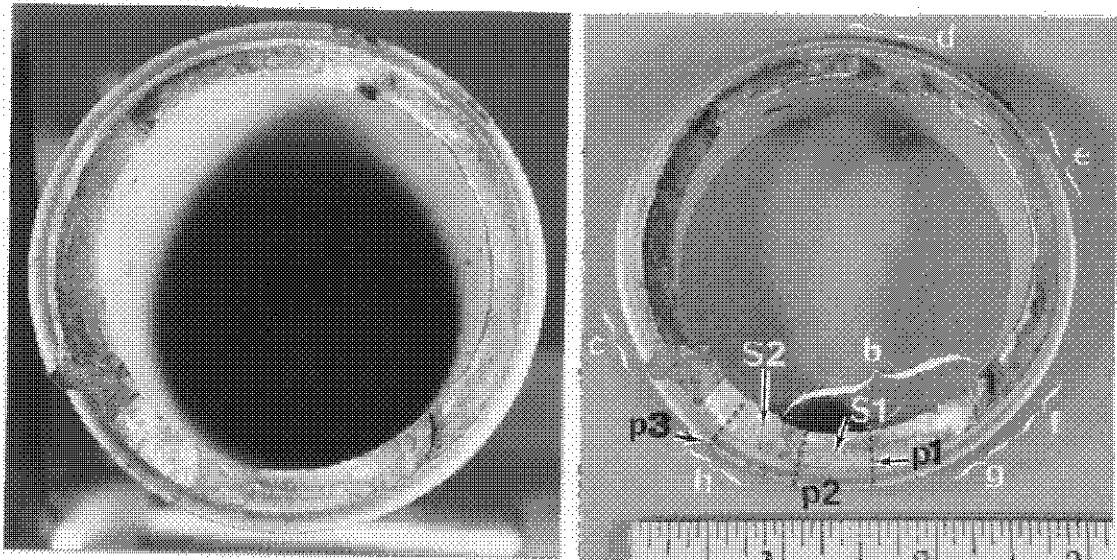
The jackscrew fracture face as received (left view) and after cleaning (right view).
